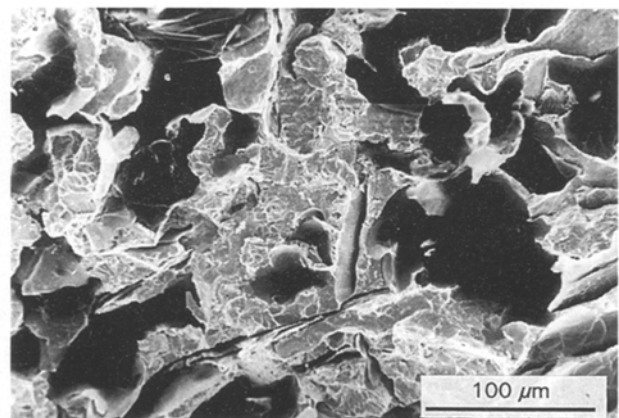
Fractograph of Alloy D specimen taken 70 mm from chill end and cast using a 25 mm chill.
